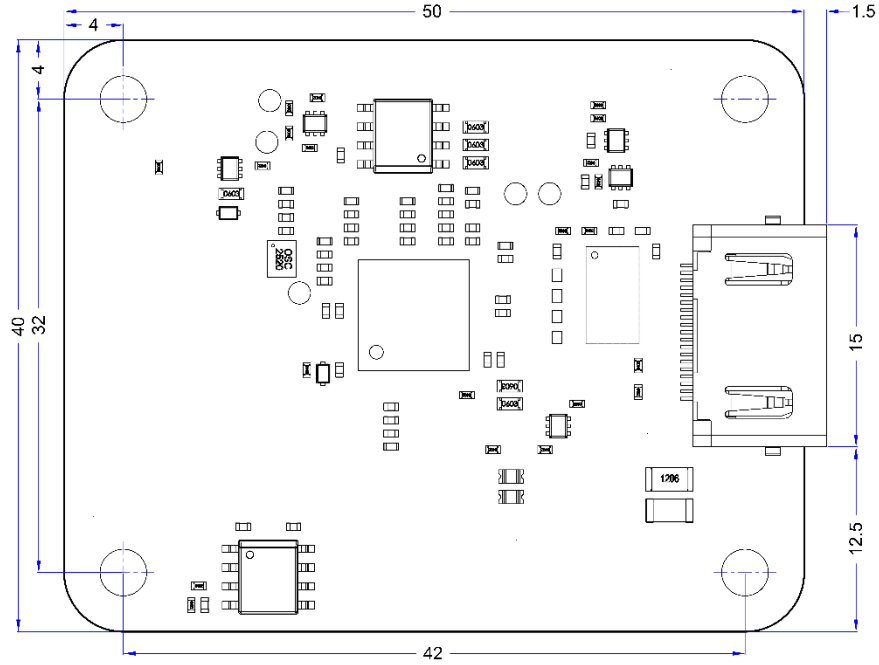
Verdin DSI to HDMI Adapter Dimensions in mm (top side, top view).
